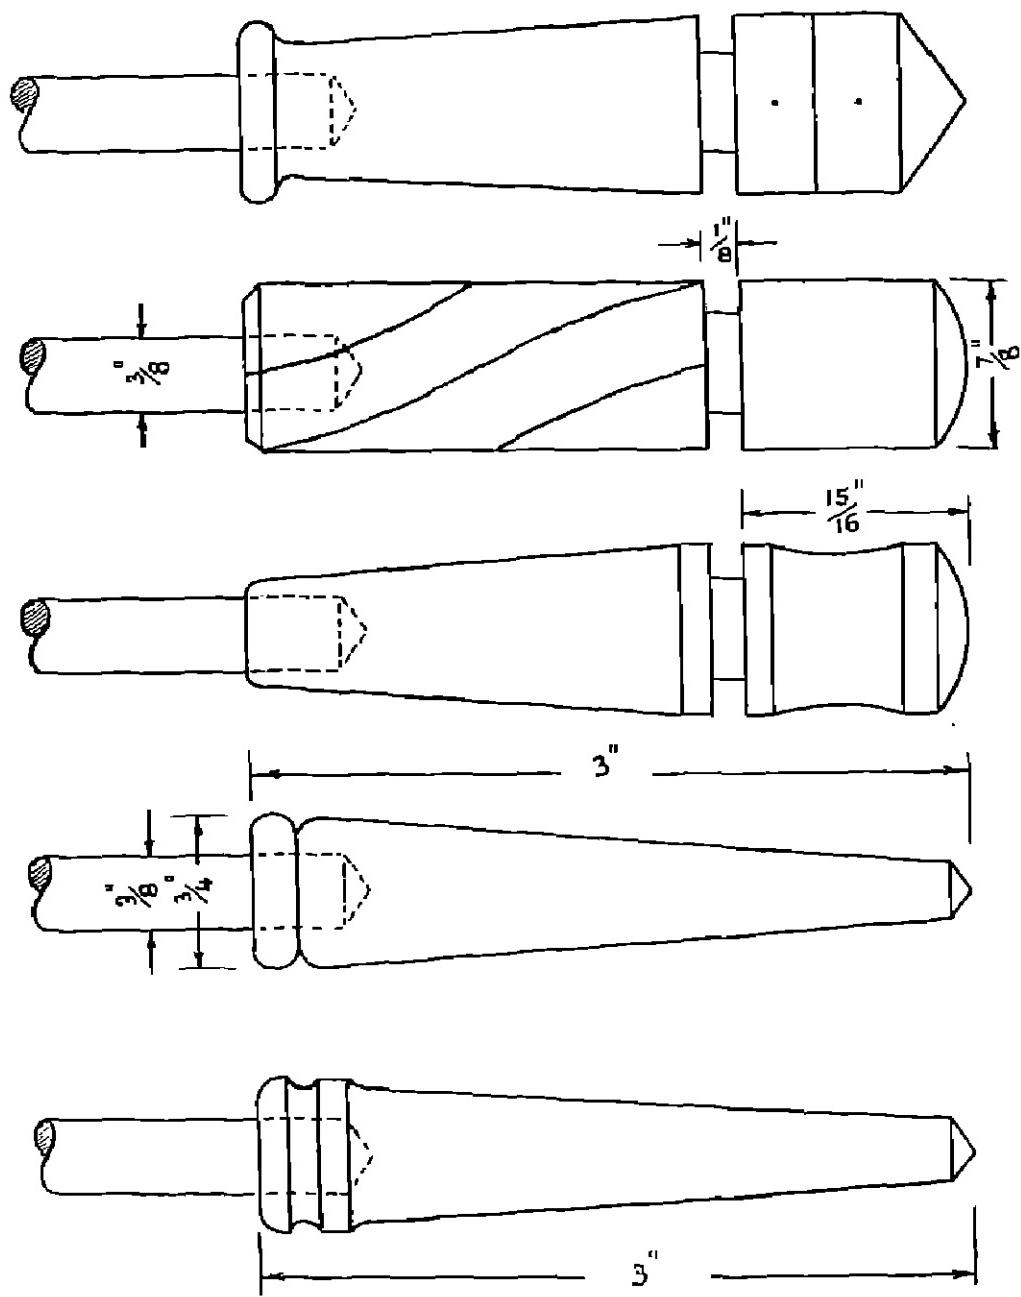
WORKING DRAWINGS OF HANDLE AND POKER BOLTS FOR HEARTH SET
